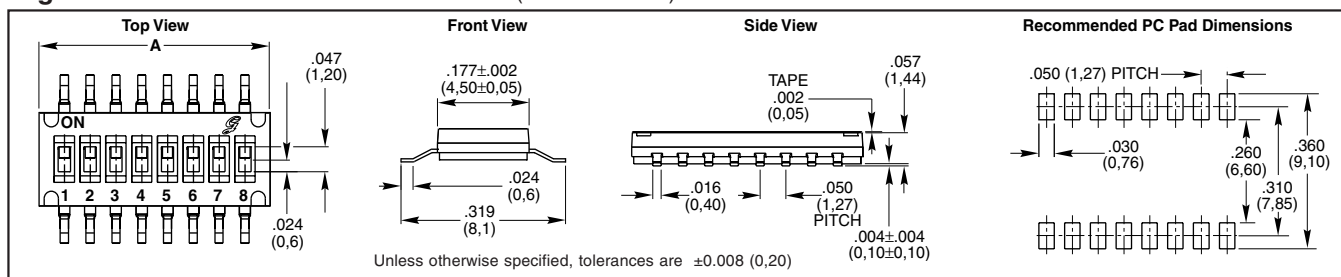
Series 97R DIMENSIONS In inches (and millimeters)
